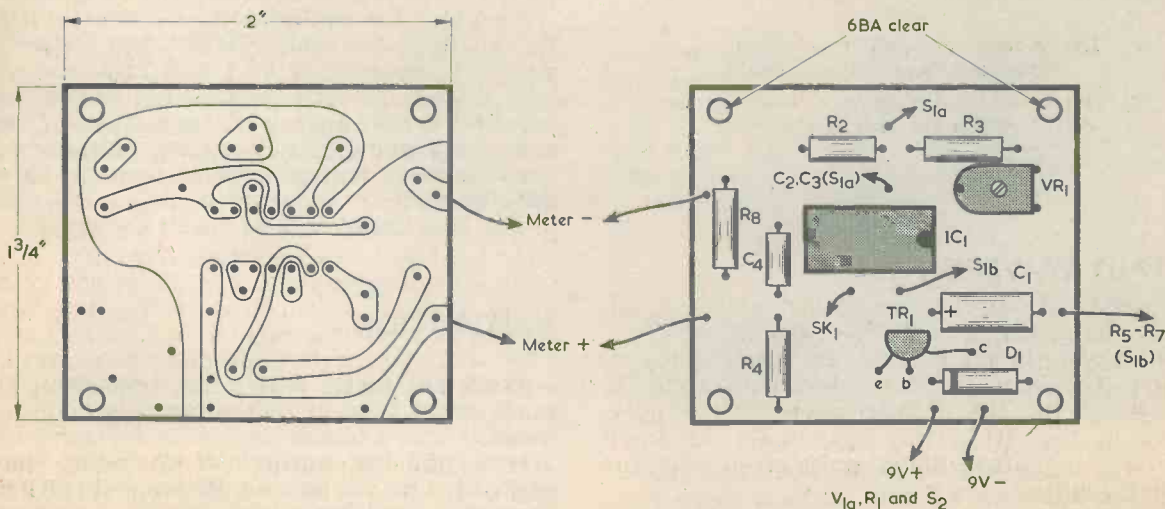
The printed board layout employed in the prototype. This is reproduced full size for tracing
